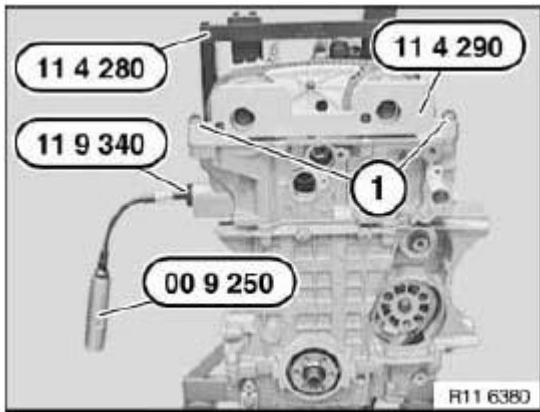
Identifying Special Tool (11 4 280), (11 4 290), (11 9 340), (11 9 350) And Cover Bolts
